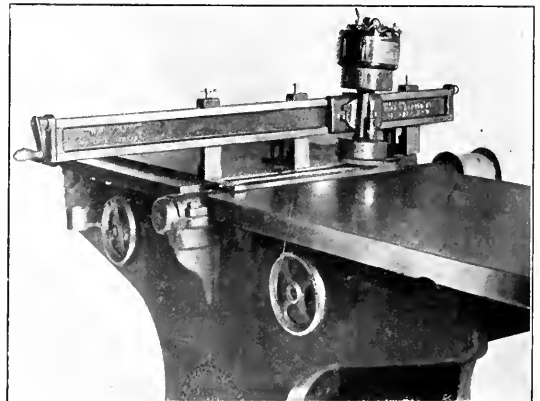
Stockbridge Grinder sharpening Jointer Knives
